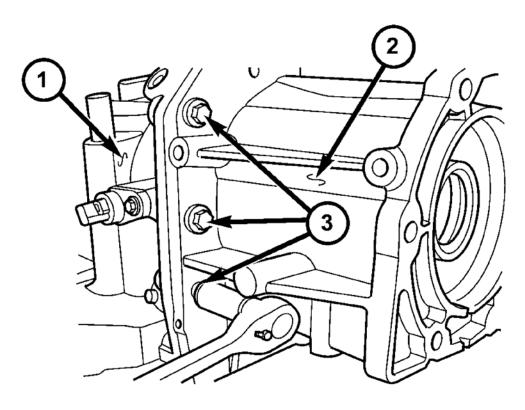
Adapter Housing Fasteners Courtesy of CHRYSLER LLC
